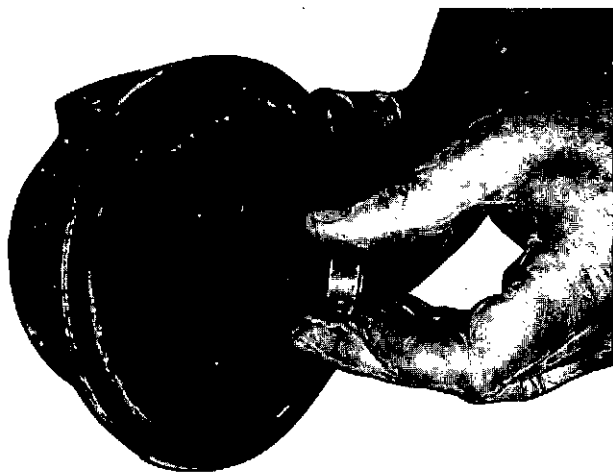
, (TA18). Removing the bearing and washer (turbine end)
